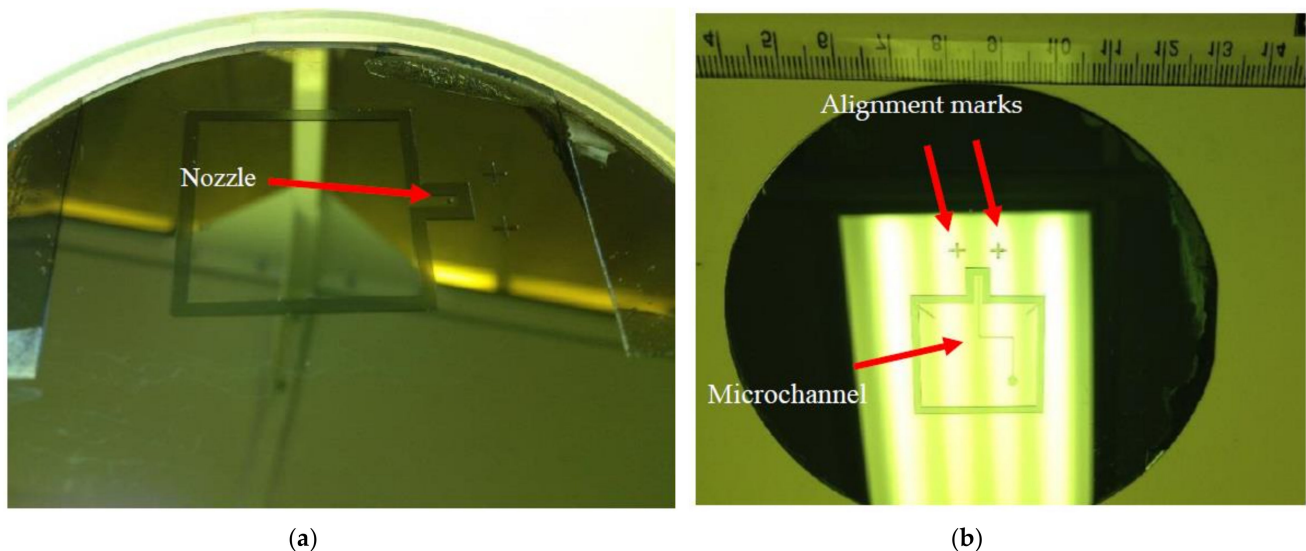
The final fabricated molds: (a) nozzle mold and (b) microchannel mold.
